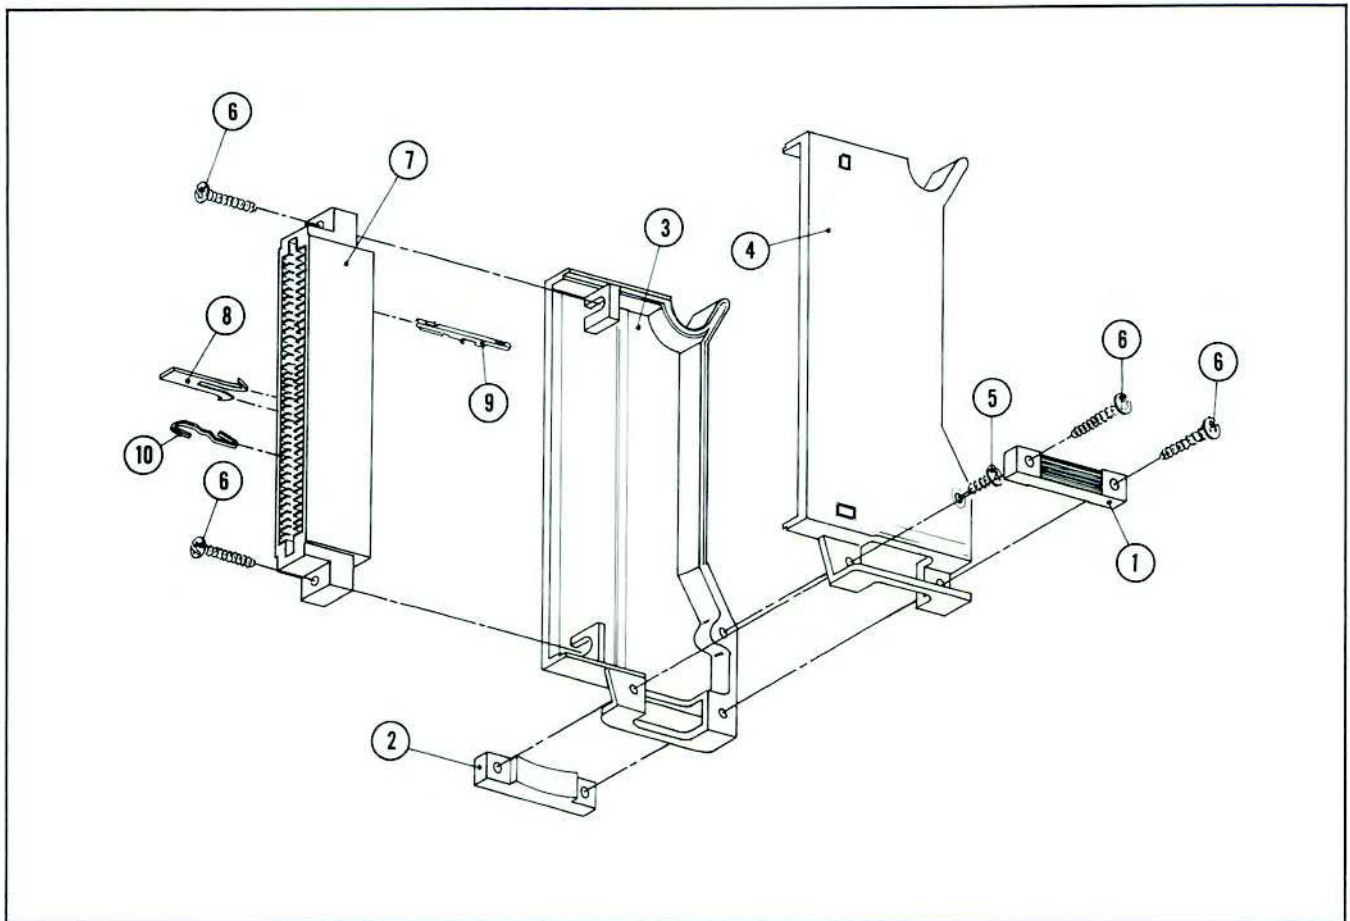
External I/O Connector Assembly, (HP, P/N 5060-2806) Exploded View
